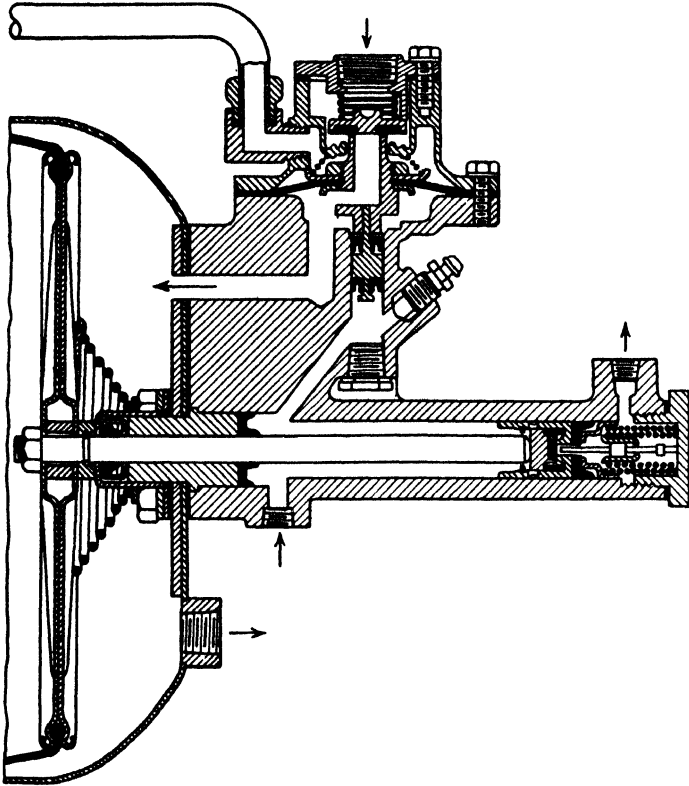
MIDLAND CONTROL VALVE AND SLAVE CYLINDER IN SECTION.
